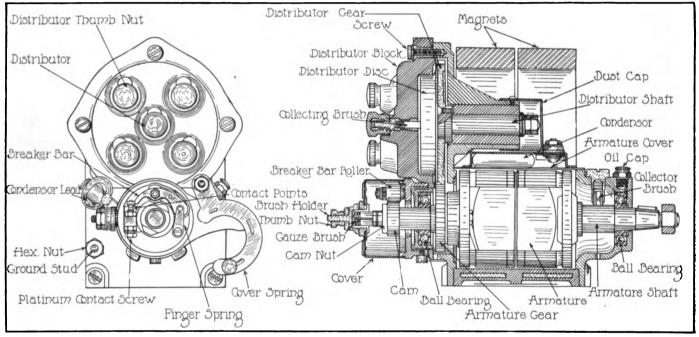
Longitudinal and End View of Model A Splitdorf Magneto, Outlining Arrangement of Components.
